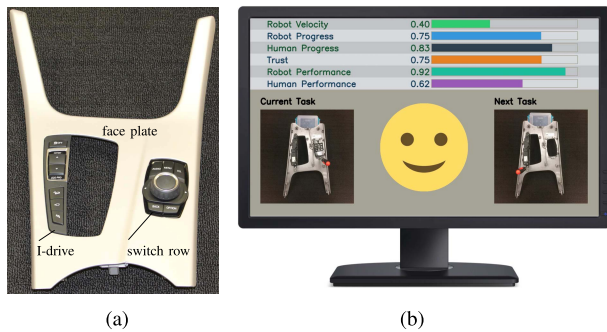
Completed assembly and information screen. (a) Assembly parts. (b) Information screen.
